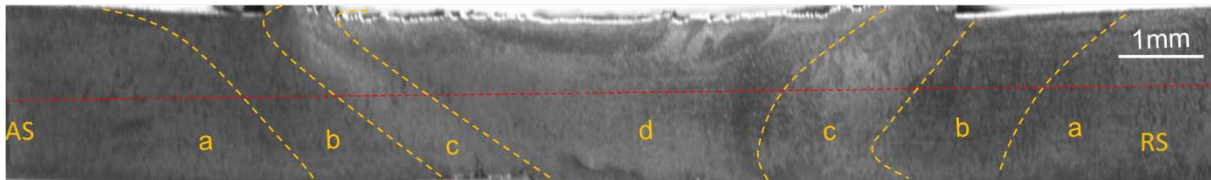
Cross section of a friction stir weld in AA2017-T4 aluminum alloy. (a) Base material, (b) Thermo-mechanically affected zone, (c) Heat-affected zone, (d) Nugget zone
